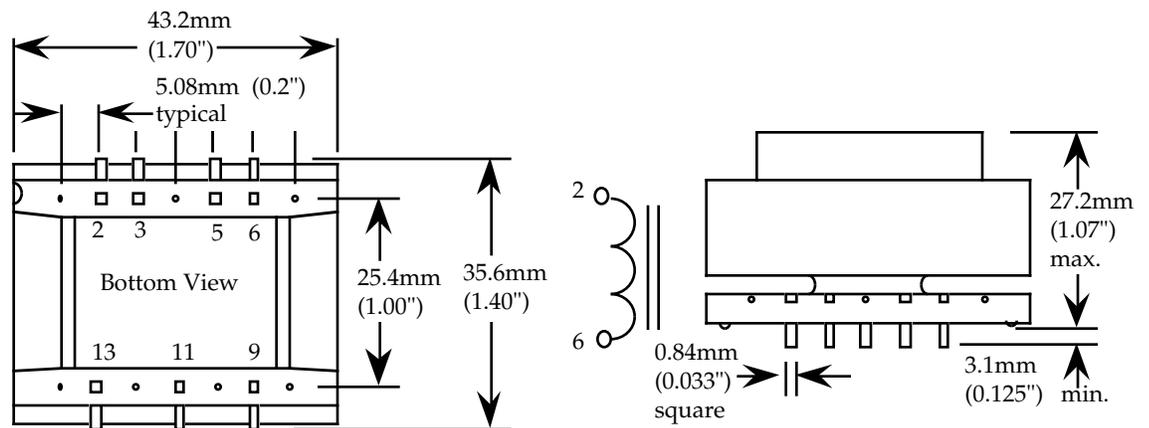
Mechanical Dimensions for Inductor (Recipe "B")
